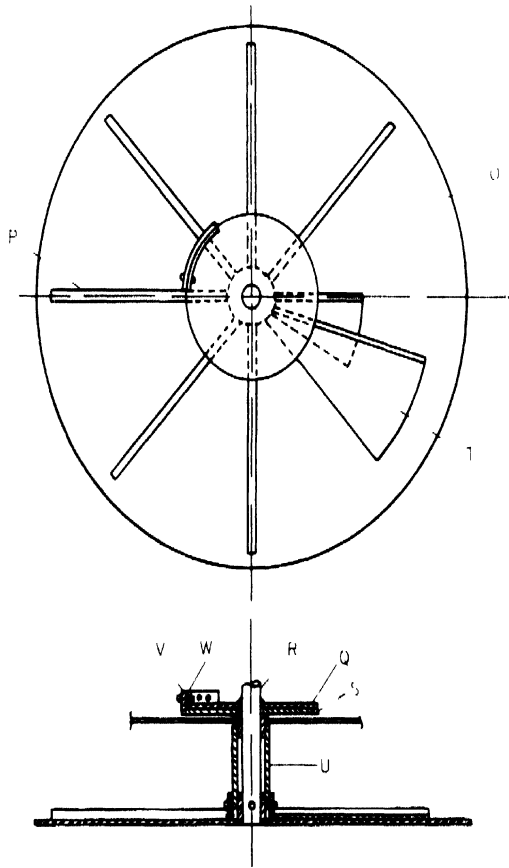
Rotating disc assembly. O, Disc; P, Radial stiffeners; Q, Top disc; R, Shaft; S, Bottom disc; T, Flap; U, Pipe; V, Locking plate (bottom disc); W, Locking plate (top disc)
